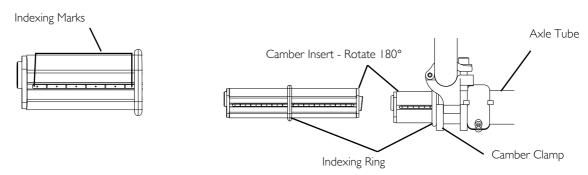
Repositioning Camber Inserts (Adjusting Rear Wheel Camber).
